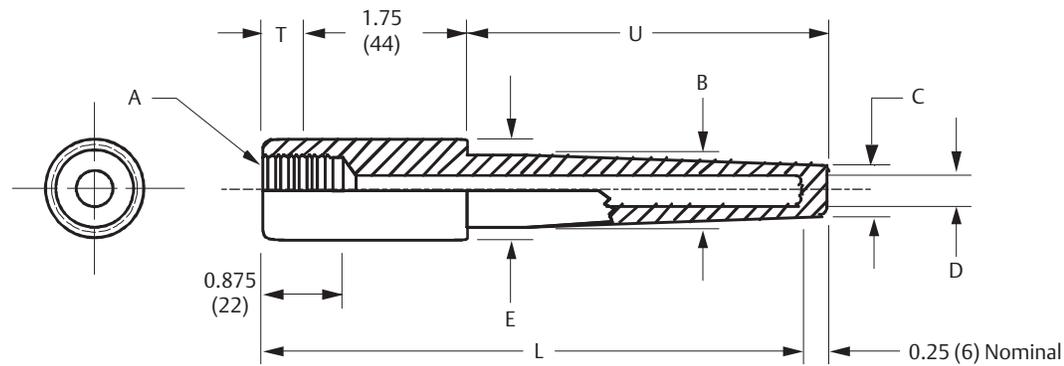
Weld Mounted Thermowells - Straight⁽¹⁾
